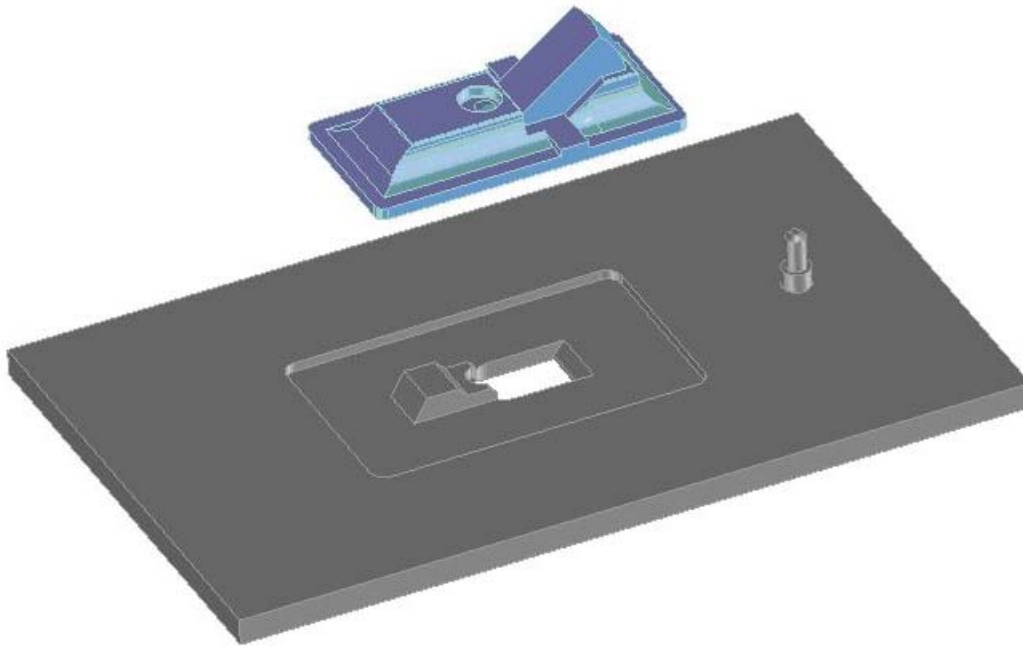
Illustration of base plate mounting features for ADNS-5110-001 optical mouse trim lens
